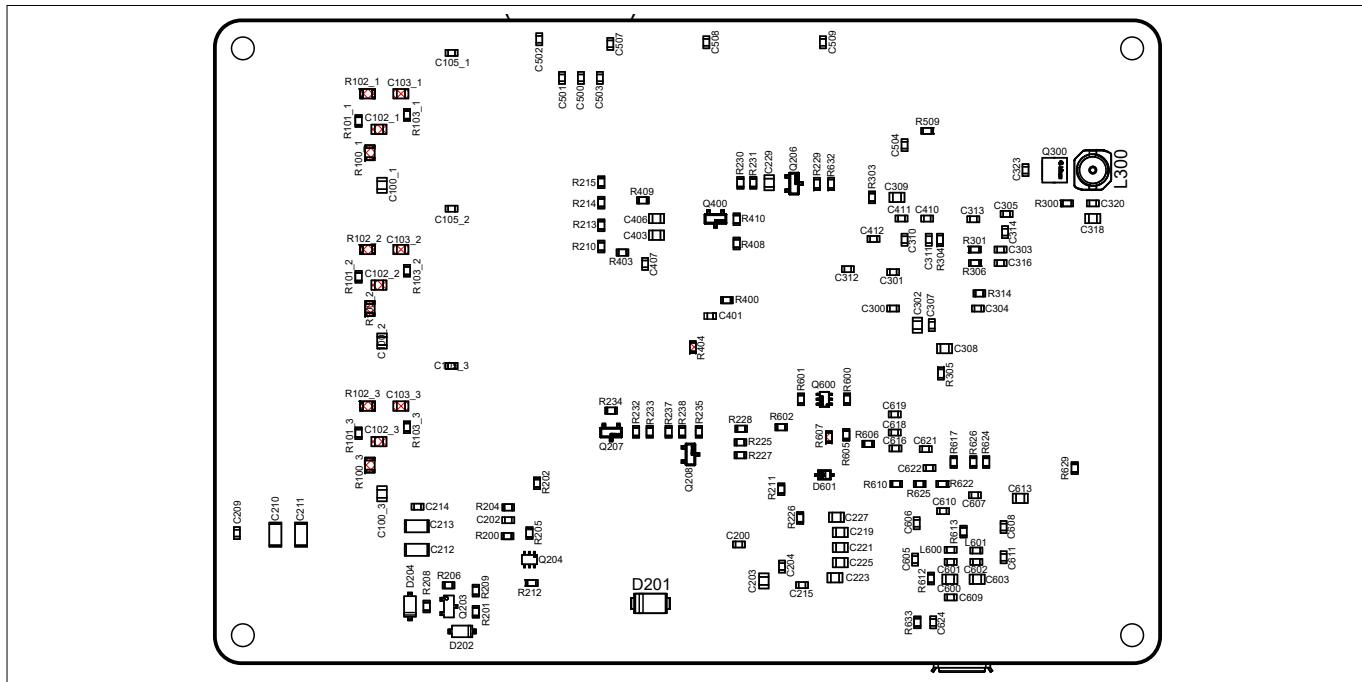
Assembly option TLE9189 evaluation kit bottom view
